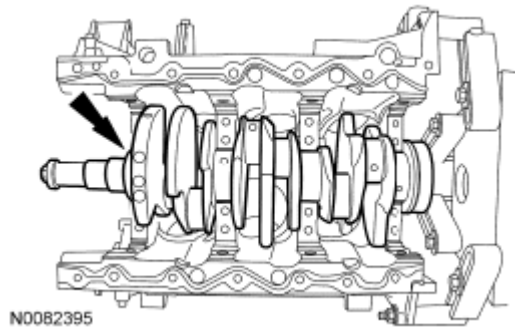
Installing Crankshaft Onto Upper Main Bearings
